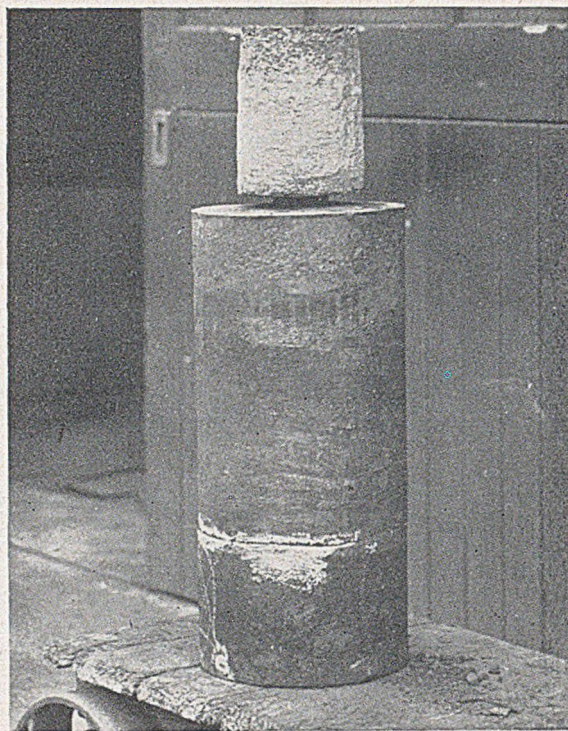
Hydraulic Cylinder Casting, with Feeder Head attached, after using a Knock-off or Breaker Core in the Mould.
